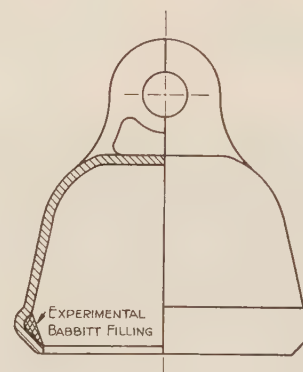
CAP WITH BEARING SURFACE FILLED WITH BABBITT TO DESIRED ANGLE
